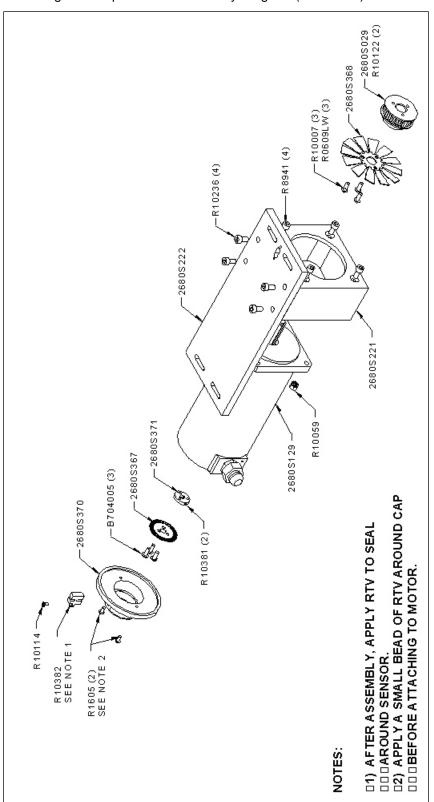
Spindle Sub-Assembly Diagram (2680S806)
